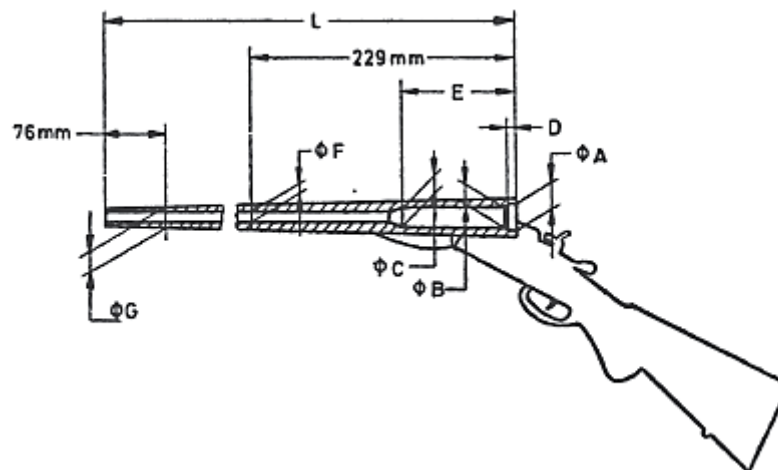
DIMENSIONS FOR BREECH LOADING SHOOT GUN
